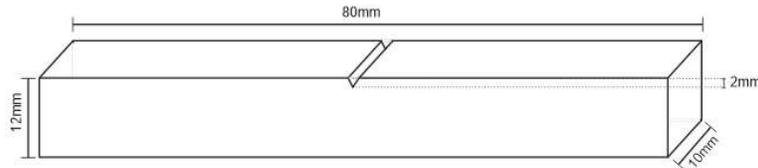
Dimensions of simple beam, Charpy type, impact test specimen.
